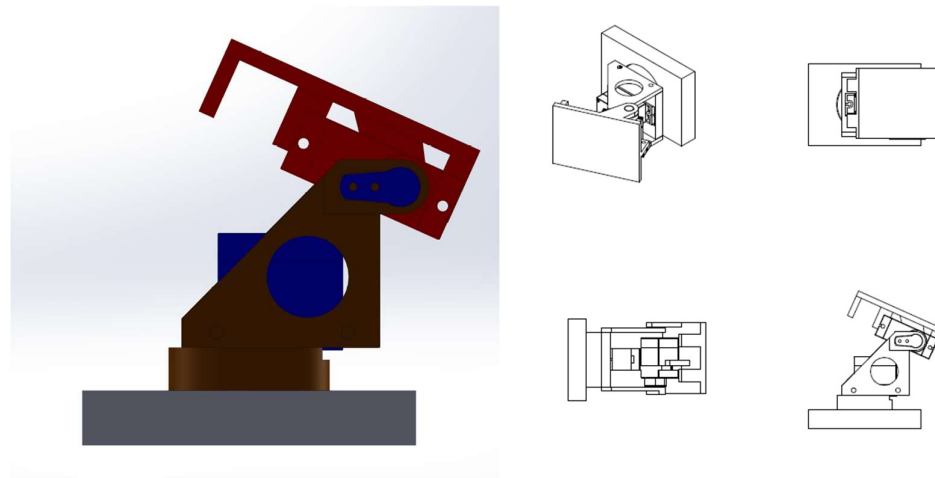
b : Sketch and Design of Pan-Tilt mechanism
